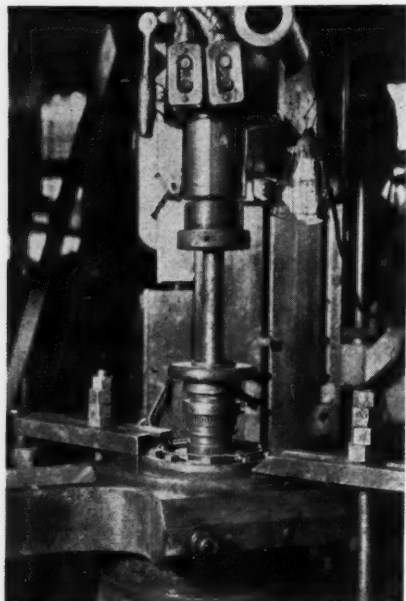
Using a Hutto Hone and Improved Honing Machine to Recondition a Hardened Steel Liner Bushing
